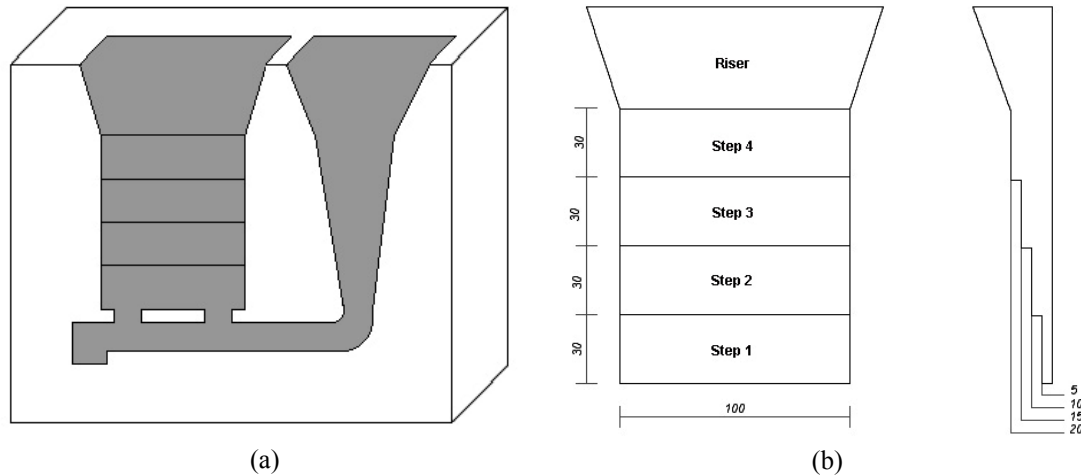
Schematic view of the die adopted (a); front and side views of the step castings (b). All the measures are in mm.
